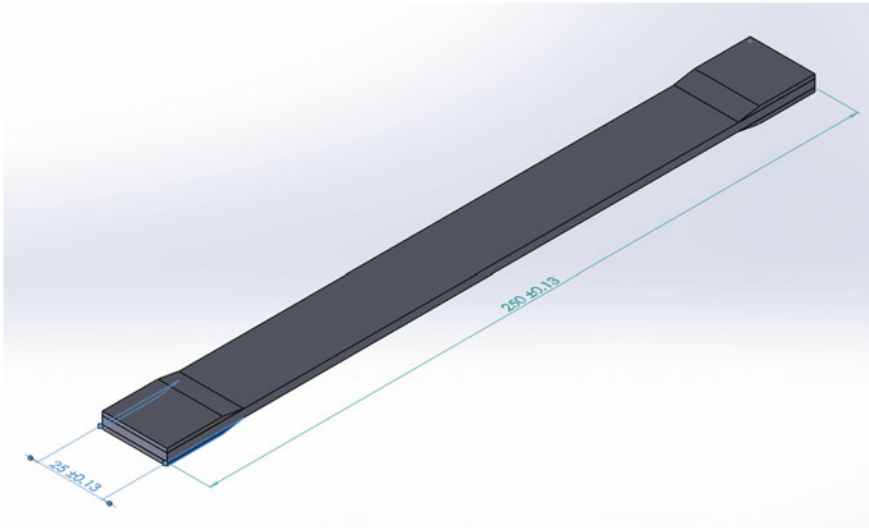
Isometric view of tensile test sample using ASTM D3039 standard
